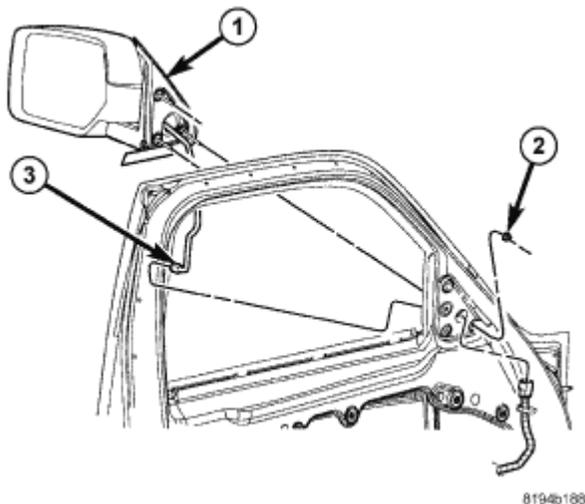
Mirror Assembly, Nuts & Electrical Connector
